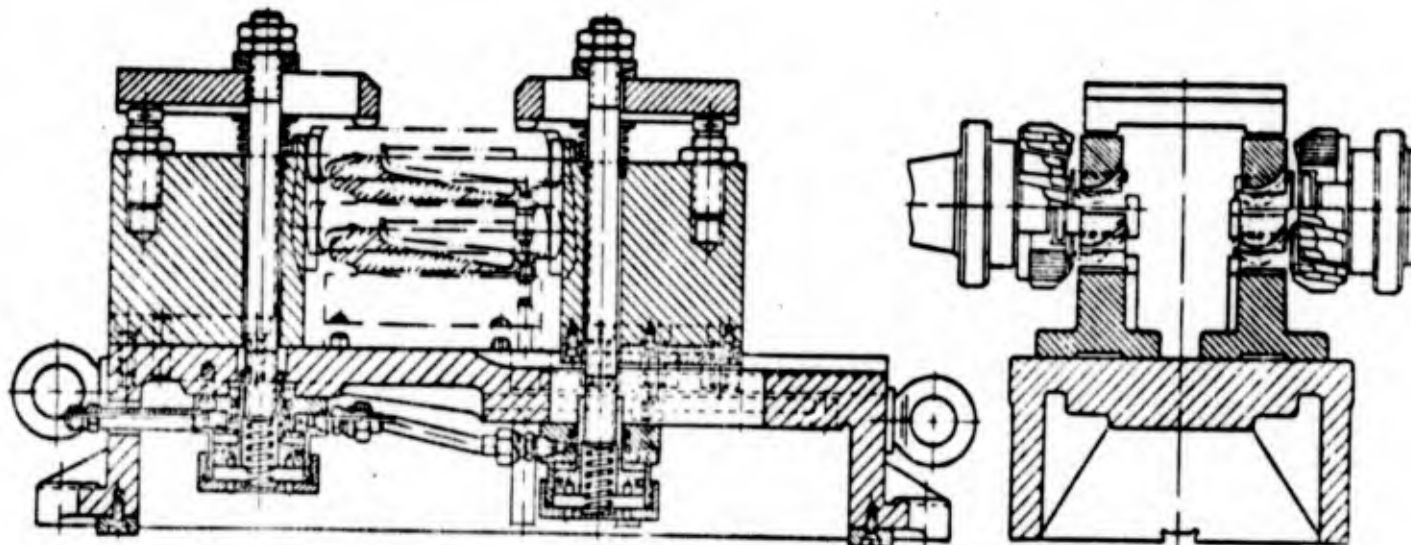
Milling of lateral faces of rotor blades on duplex longitudinal-milling machine.
